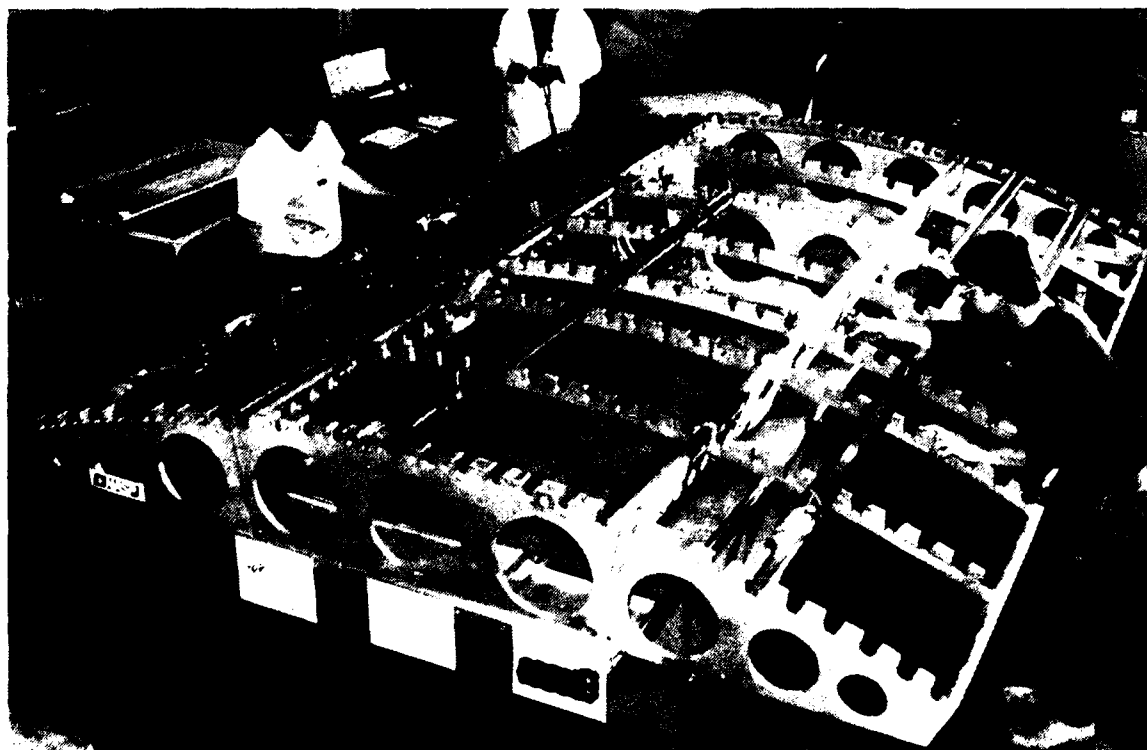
FSA Assembly Tool and Spotwelding Jig
